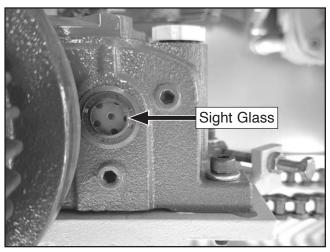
Location of table elevation motor gearbox sight glass (viewed from left side).
